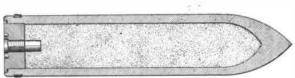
12-INCH TORPEDO SHELL; 144 POUNDS OF HIGH EXPLOSIVE.
